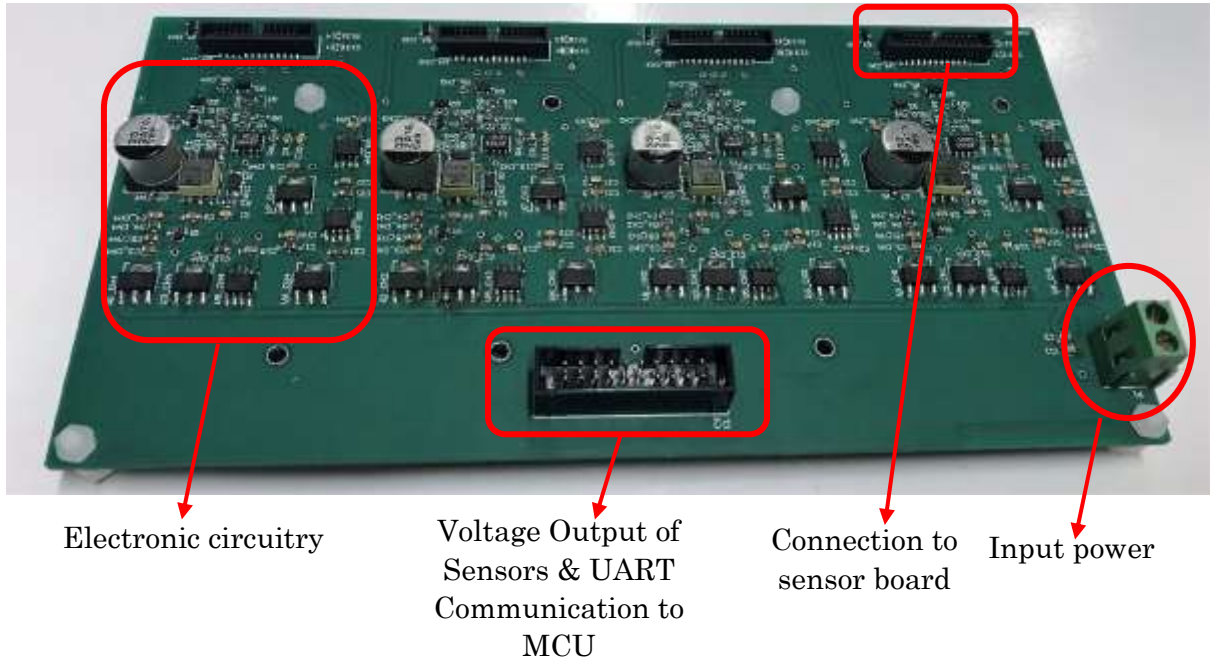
Manufactured PCB board for controlling 4 sensor boards
